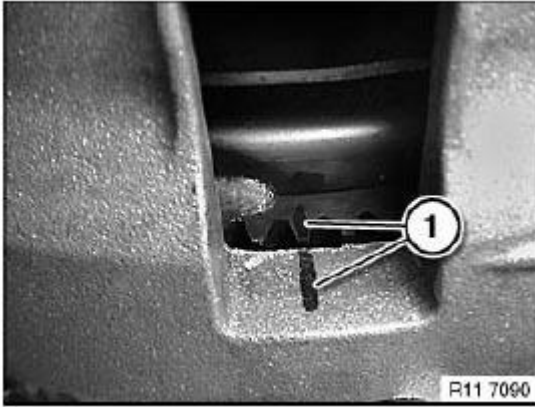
Identifying Line On Flywheel And Transmission Housing
